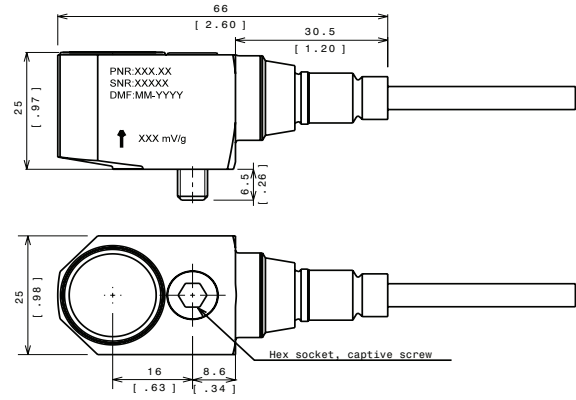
Outline drawing & Electrical layout for MIL-C-5015 Connector (B=1)
